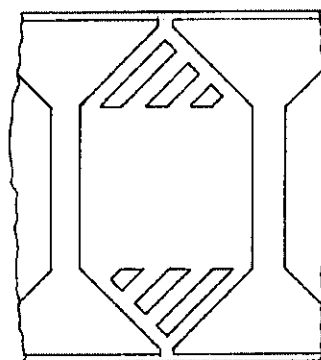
Fracture belt type "Ladder tape" [9].
